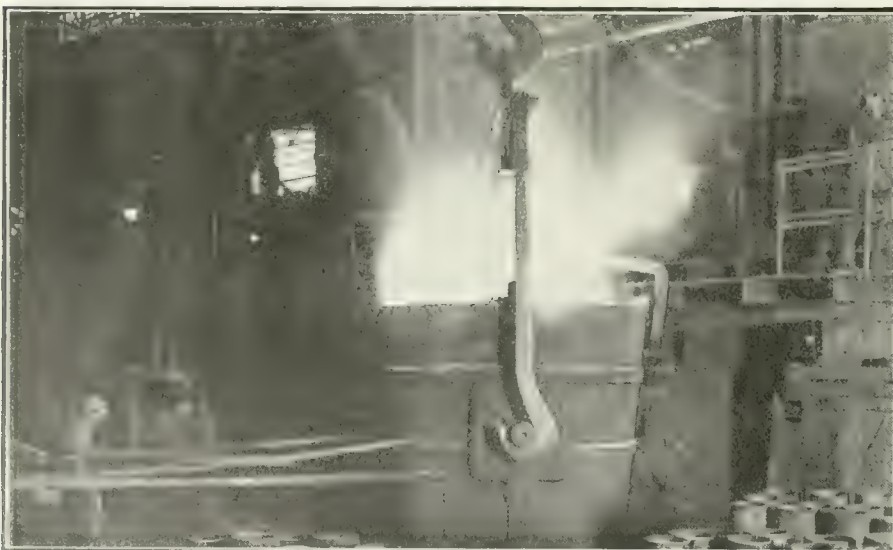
TIPPING BOTTOM POURING LADLE AT OPEN-HEARTH FURNACE.
